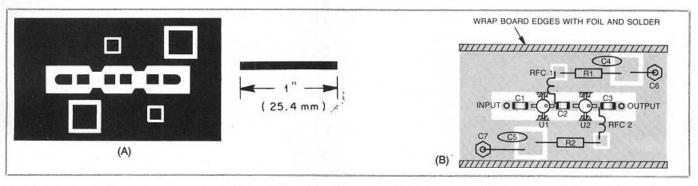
Etching pattern and PC-board layout information for the microstripline MMIC amplifier of Fig 8. All components mount on the circuit-trace side of the board. A PC board can be etched from the pattern shown at A, or a sharp knife and hot soldering iron can be used to clear away unwanted copper. Black areas represent unetched copper.
